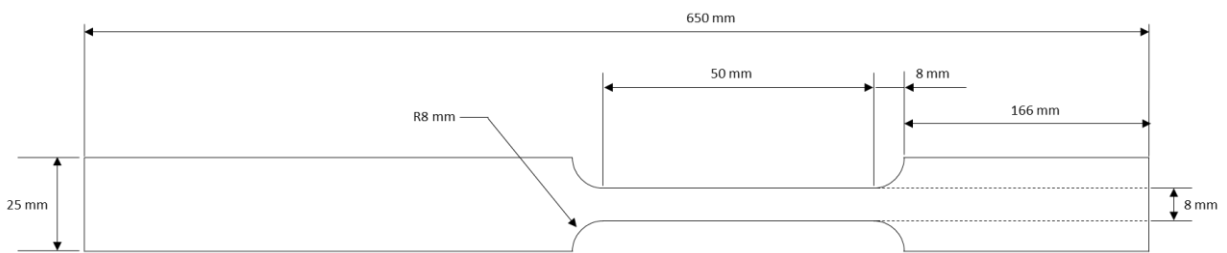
Dynamic tension test specimen dimension used at 100 s^{-1} .
